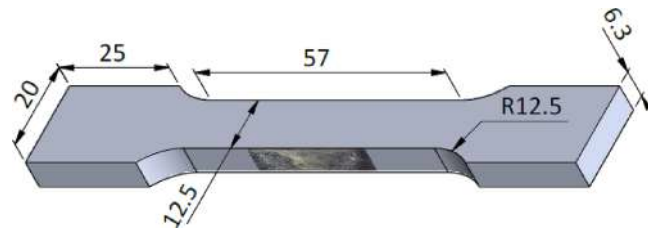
Specimens geometric dimensions of tensile test used for FSW welding joints and BM (in mm).
